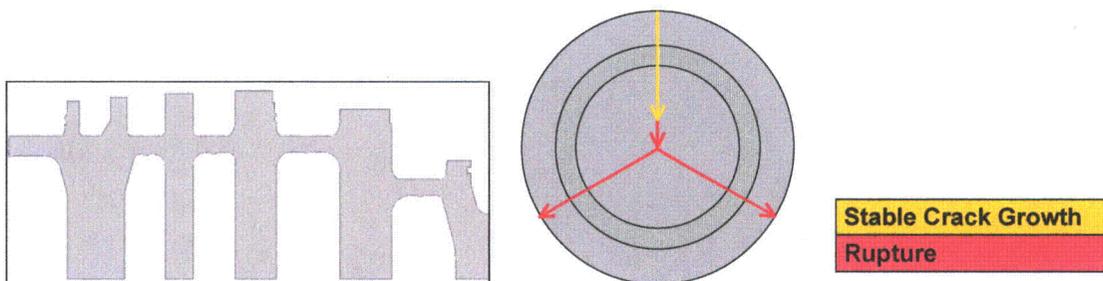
Hypothetical failure mode of welded LP-rotor due to SCC
